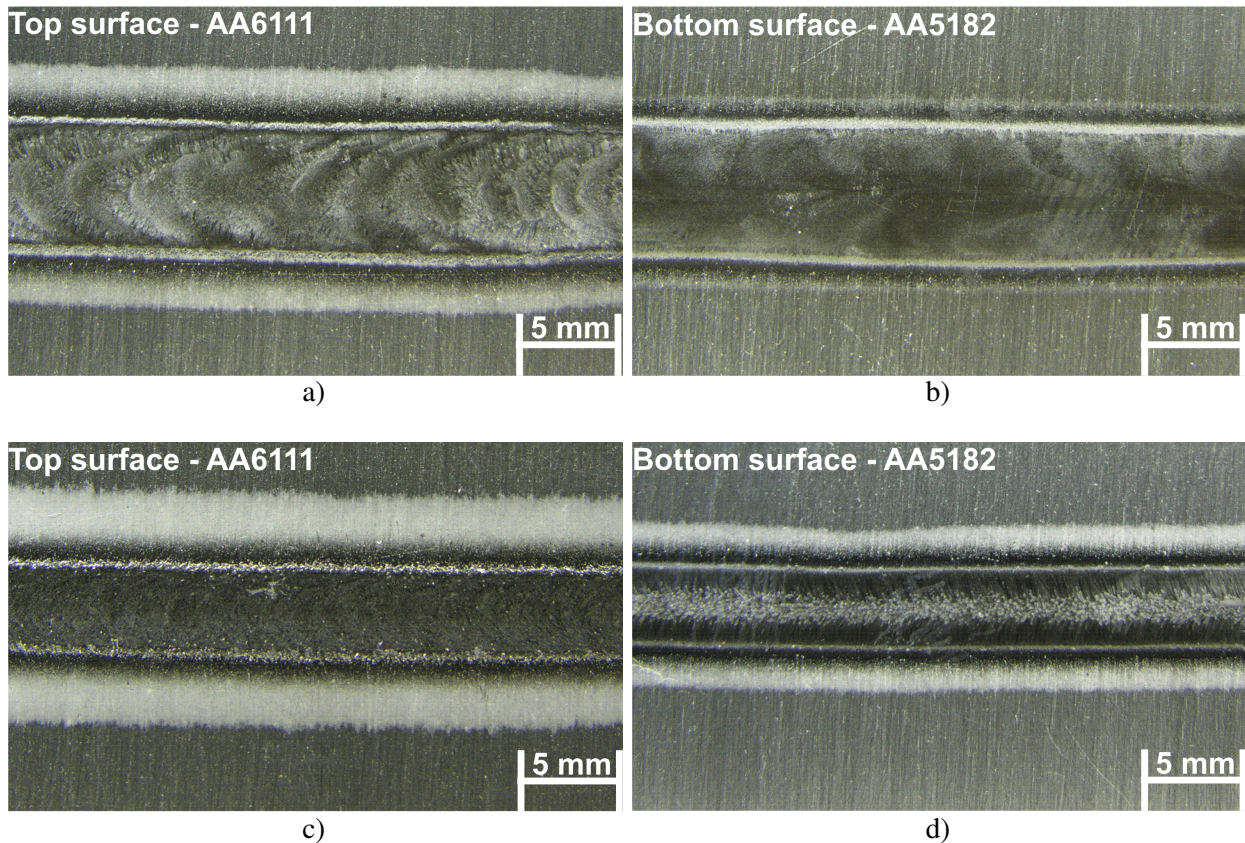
Photographs of welds produced between 1 mm thick AA6111 and AA5182 using 2 kW welding power and welding speeds of: *a),b)* 10 mm/s welding speed; *c),d)* 15 mm/s welding speed.
